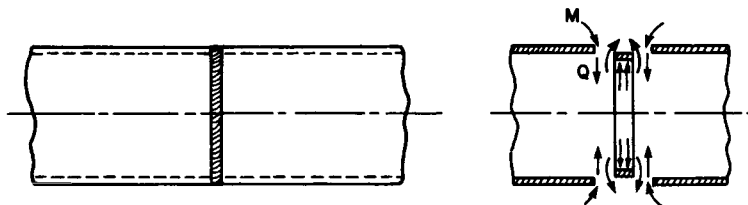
Residual stresses in a welded pipe.
